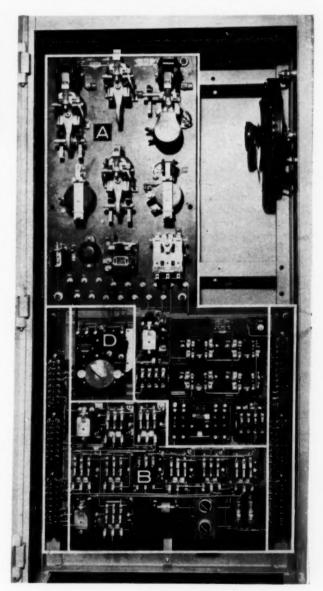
CLOSE-UP OF CONTROL PANEL FOR ROCK-DRILL THREAD GRINDER
